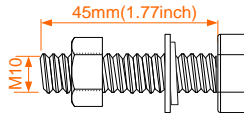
Dimensions of fastener for metal frame (figures in mm)
